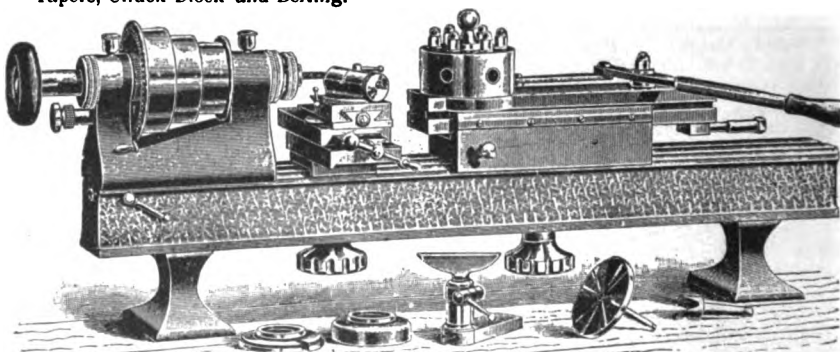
RIVETT BENCH LATHE, NO. 4, WITH TURRET ATTACHMENT.
